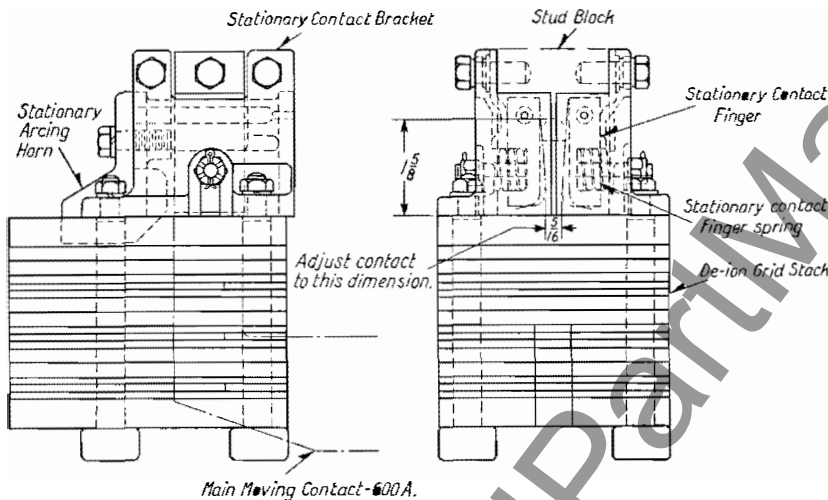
DE-ION GRID ASSEMBLY, F-100, 600-AMPERE CIRCUIT-BREAKER
